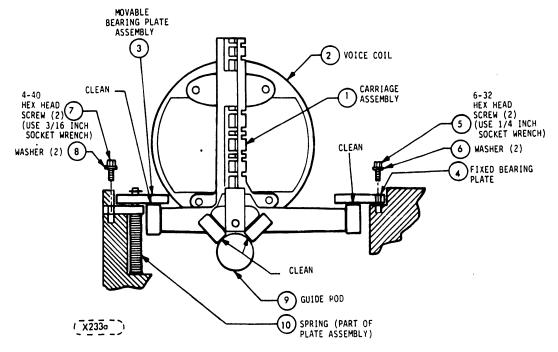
CARRIAGE RAILS AND BEARINGS
